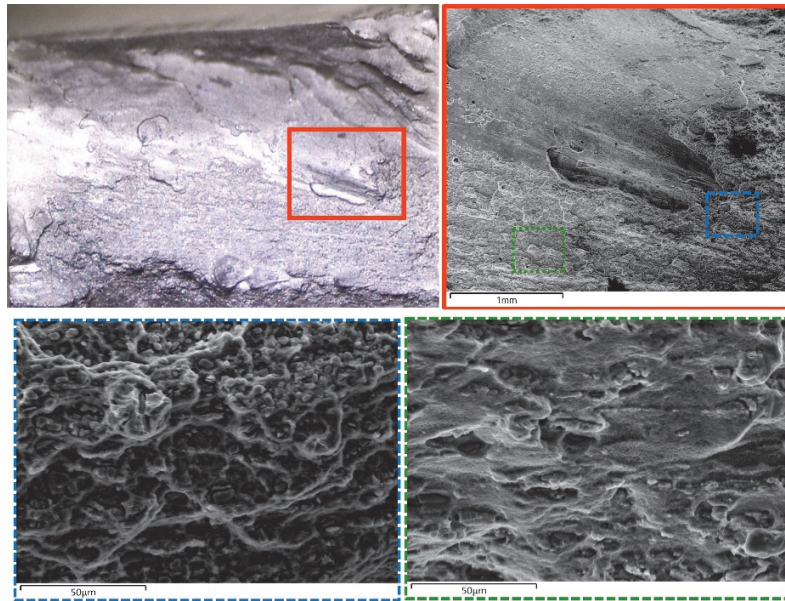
Fracture surface analysis of specimen FSW_2
